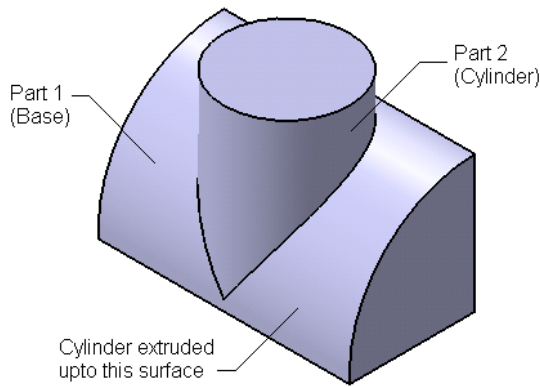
Two different parts created in a product file and the cylinder extruded up to surface
